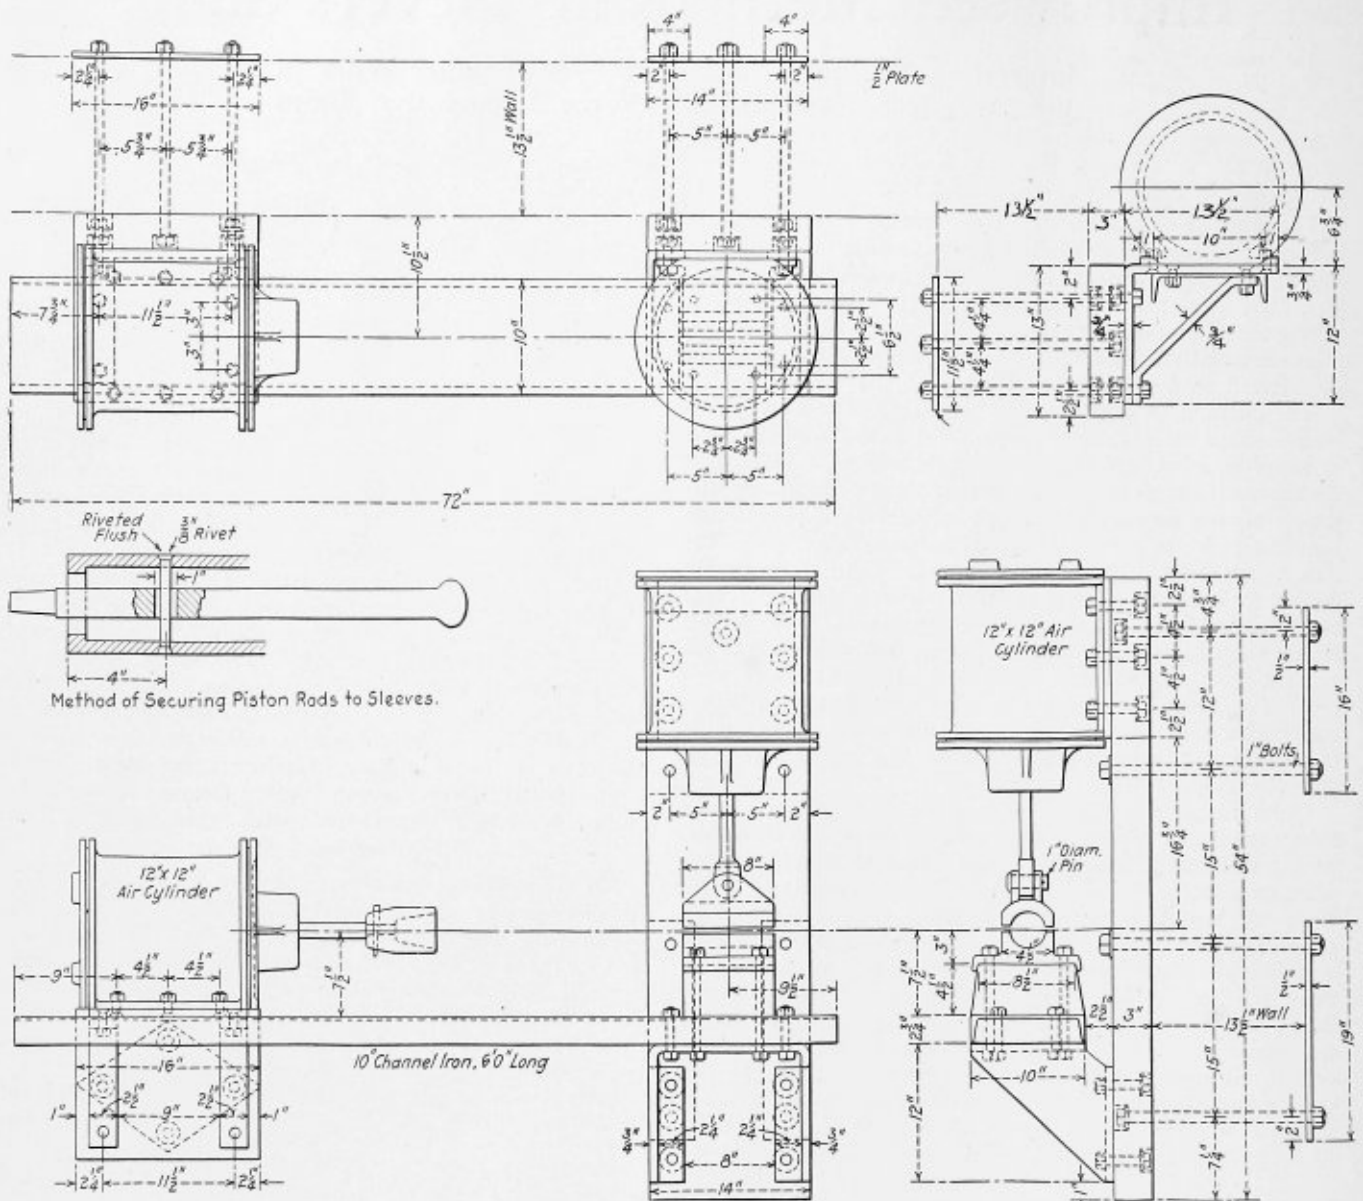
Tube Swedging Machine Adapted to Work in the Boiler Shops at Nevers, France
